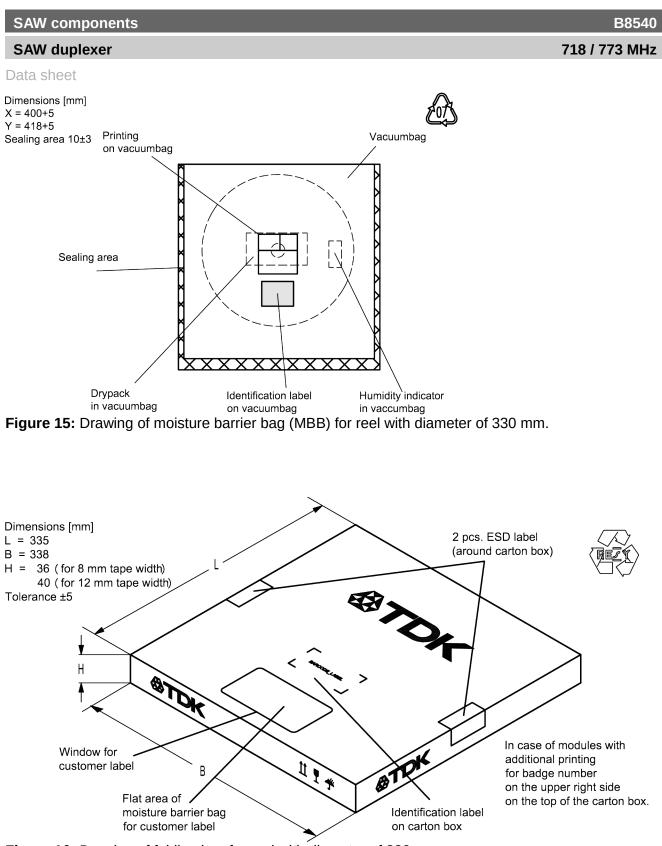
Drawing of folding box for reel with diameter of 330 mm.
